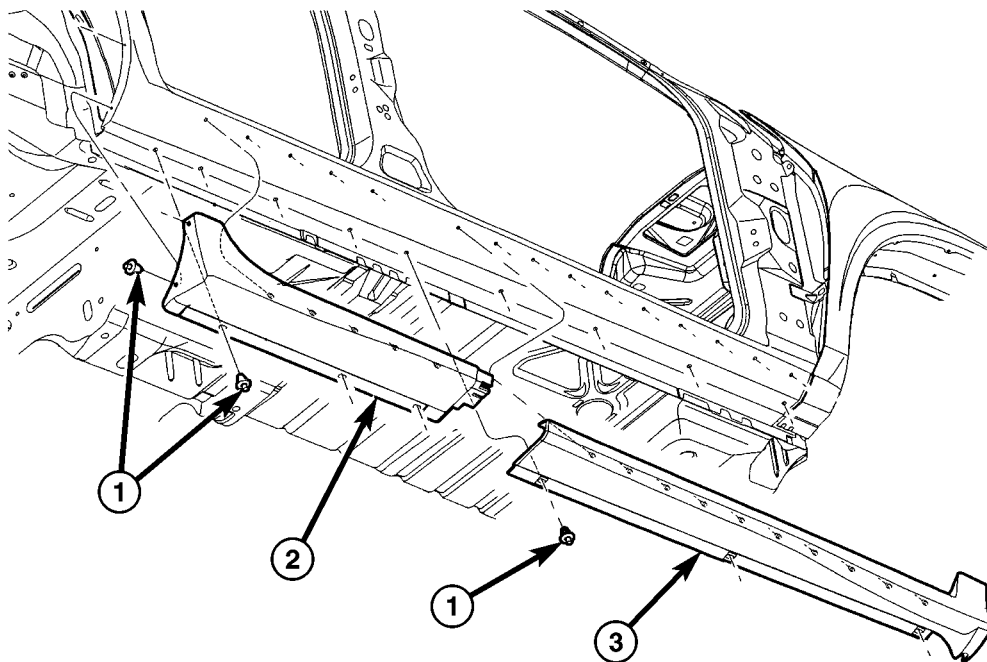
SILL EXTENSION MOLDING - SRT-4
